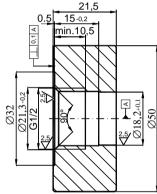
Weldable fitting ring for use with transmitters with CG1/2 - type connector Material – 316Lss
